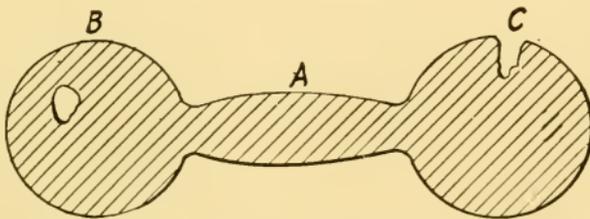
Dumb-bell casting with shrink holes in each ball.
